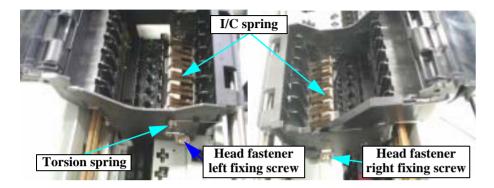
Head Fastener Fixing Screws and Torsion Spring
